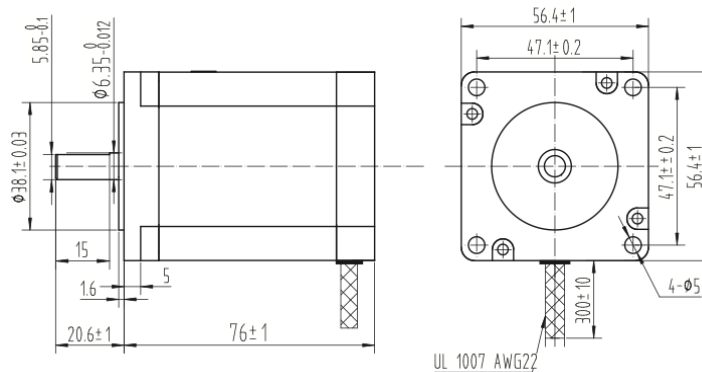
Dimensions of NEMA 23 Stepper Motor
